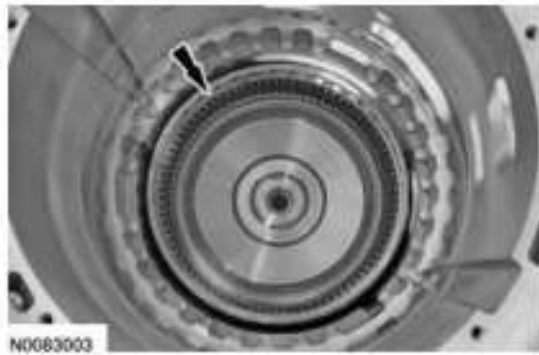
Locating Planet Carrier Hub And Output Shaft Assembly
